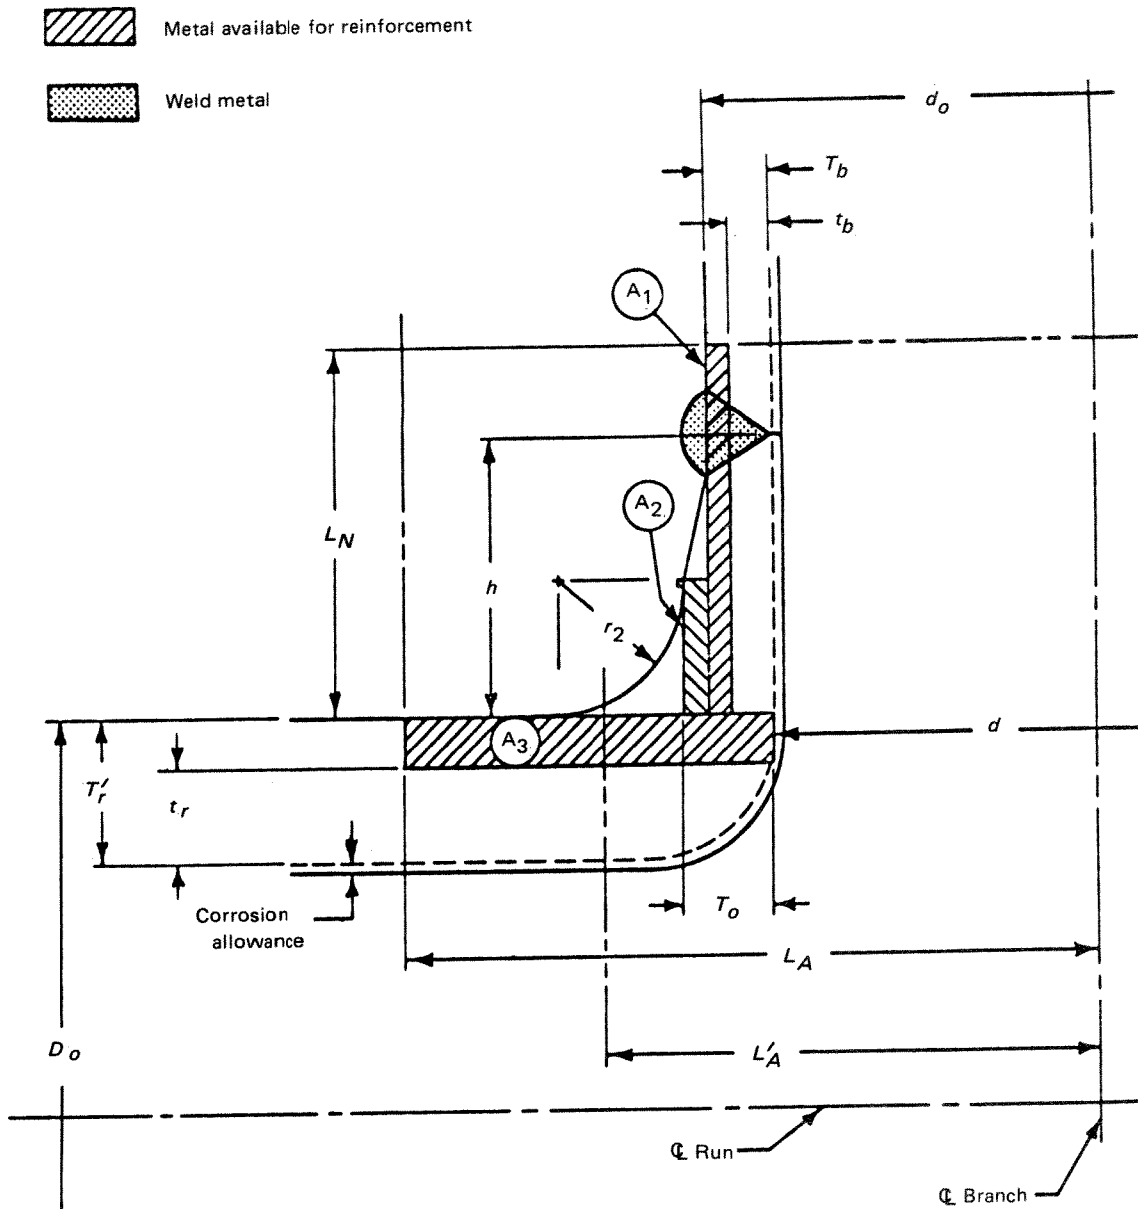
(a)-2 TYPICAL REINFORCEMENT OF OPENINGS
